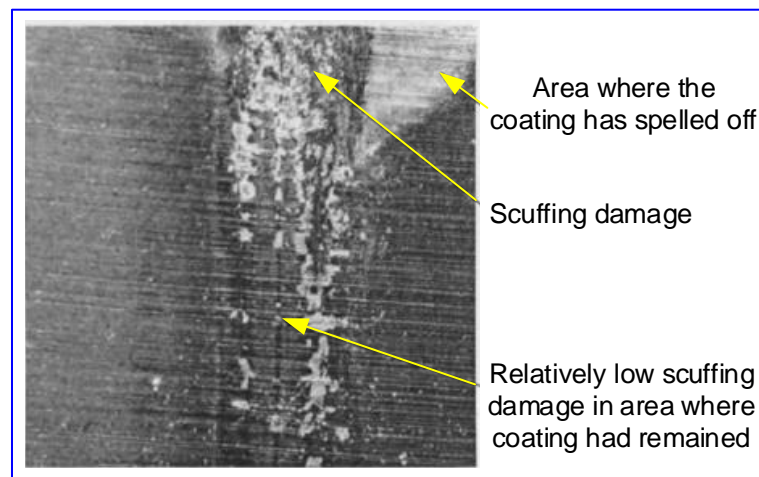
Photograph of a case carburised metal gear with Me-DLC coating following scuffing (after [27])
